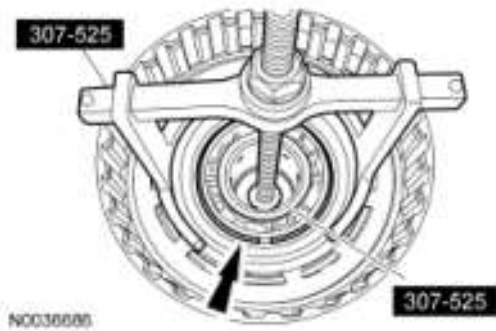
Installing Intermediate Clutch Return Spring Retainer Using Special Tool (307-525)
